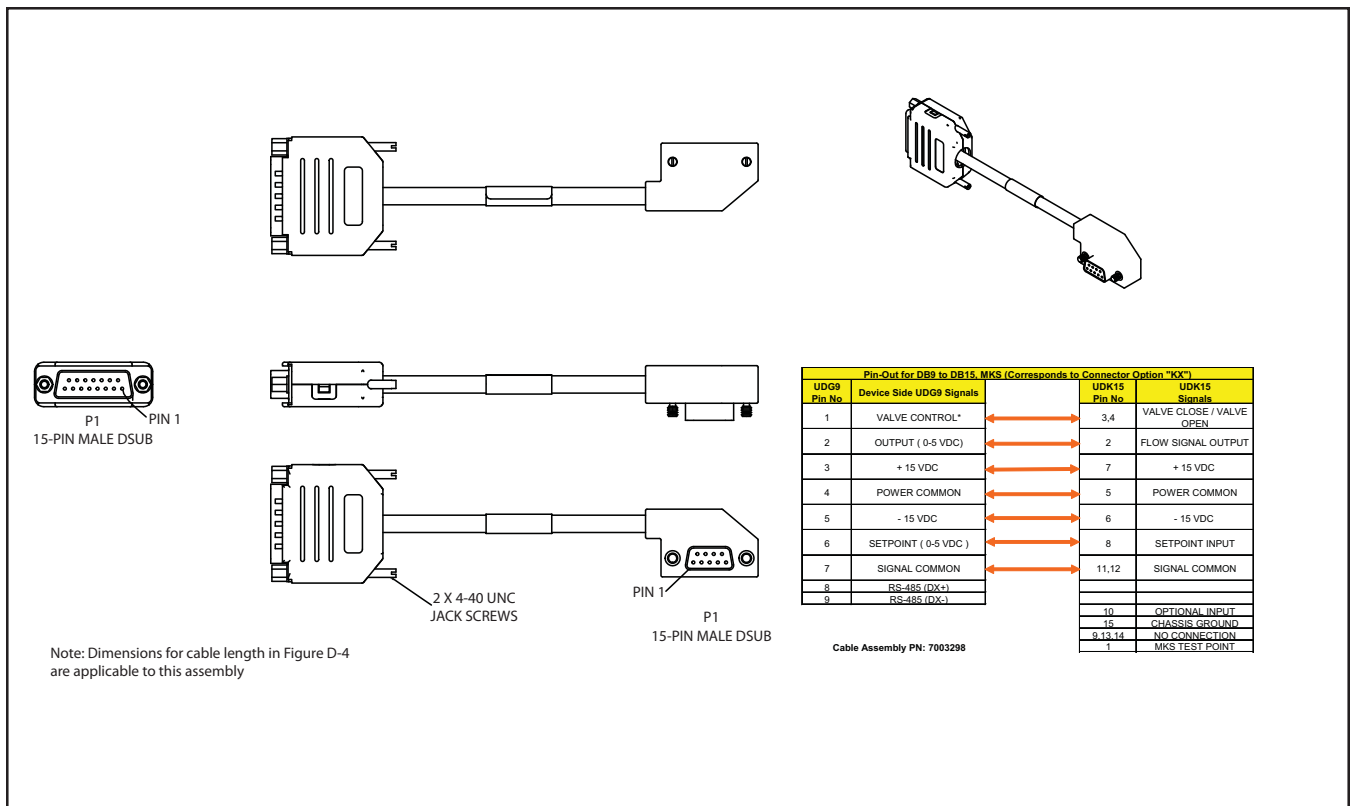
DB9 to DB15, MKS Cable Adapter Assembly
